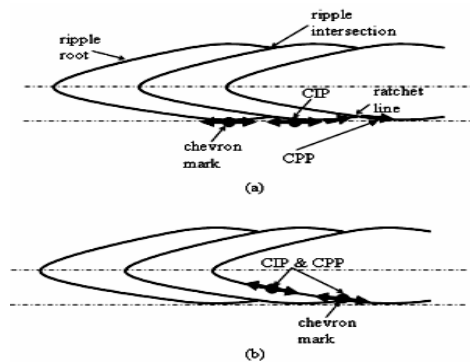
Crack trace at the weld top surface for all 13 samples
